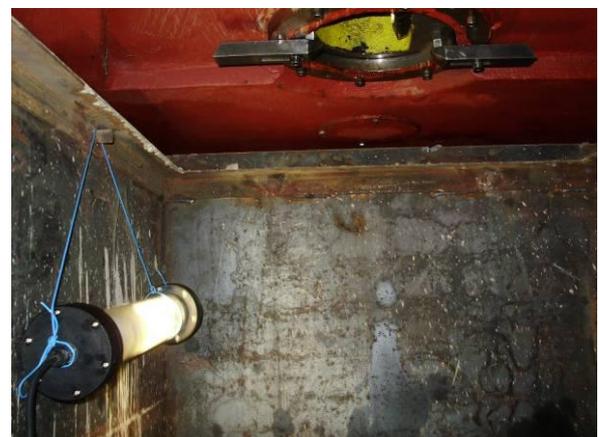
The machine lost daily oil because it turned out that still had some errors on the machine.
